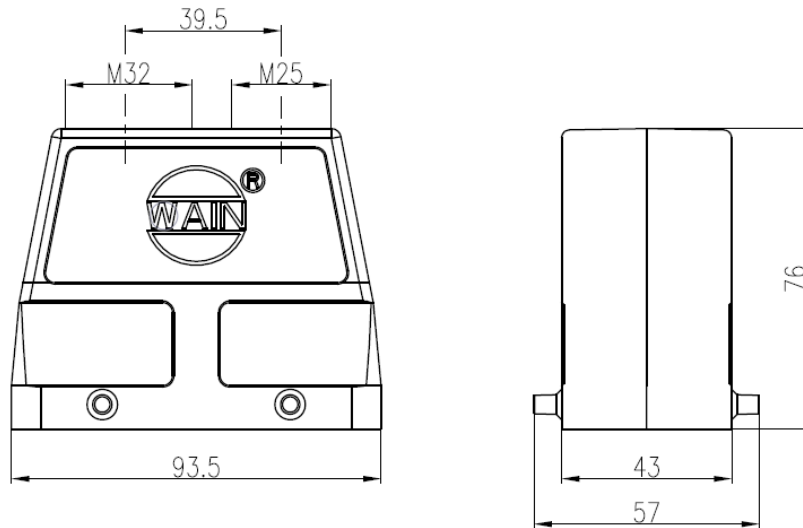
Dimensions of heavy-duty plugs on the manipulator side and cabinet side
